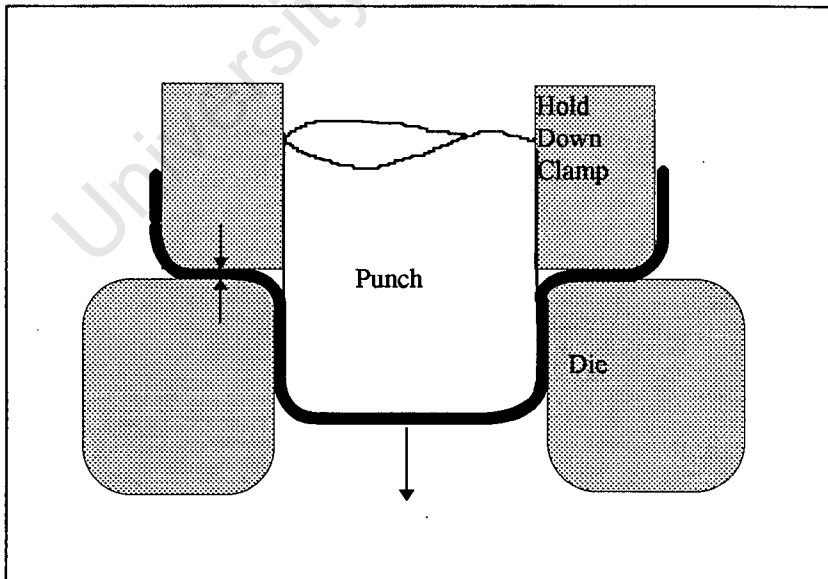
Tool and Blank Set-up for Direct Redrawing Operation
